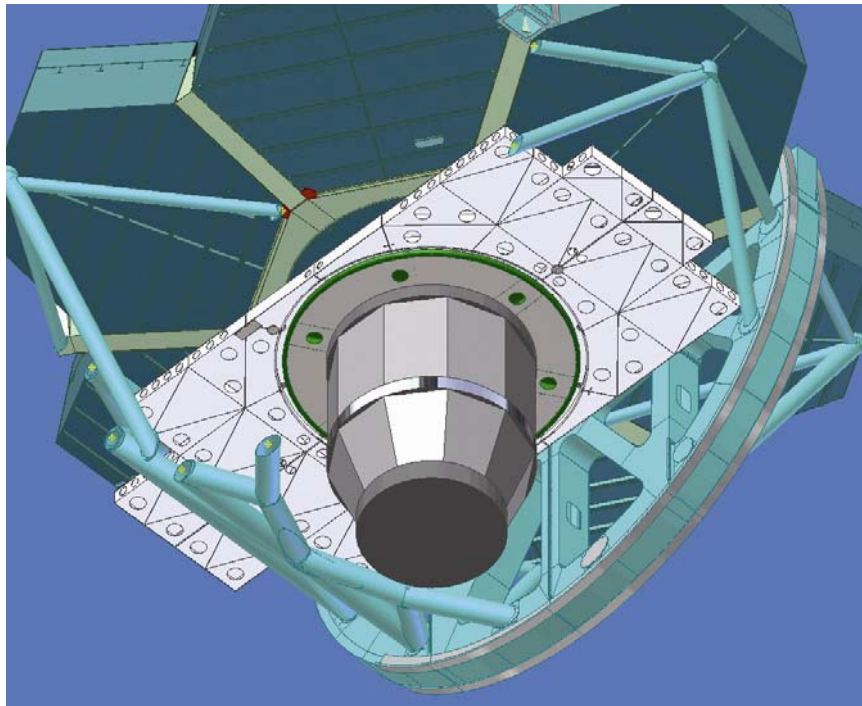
IP and Rotator from below (C-ring and some braces removed for clarity).
